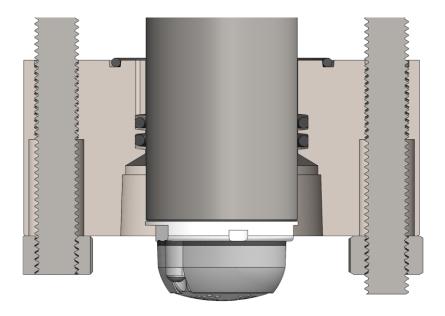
Cross-Section of Cap with sensor end pushed passed both internal O-rings.
